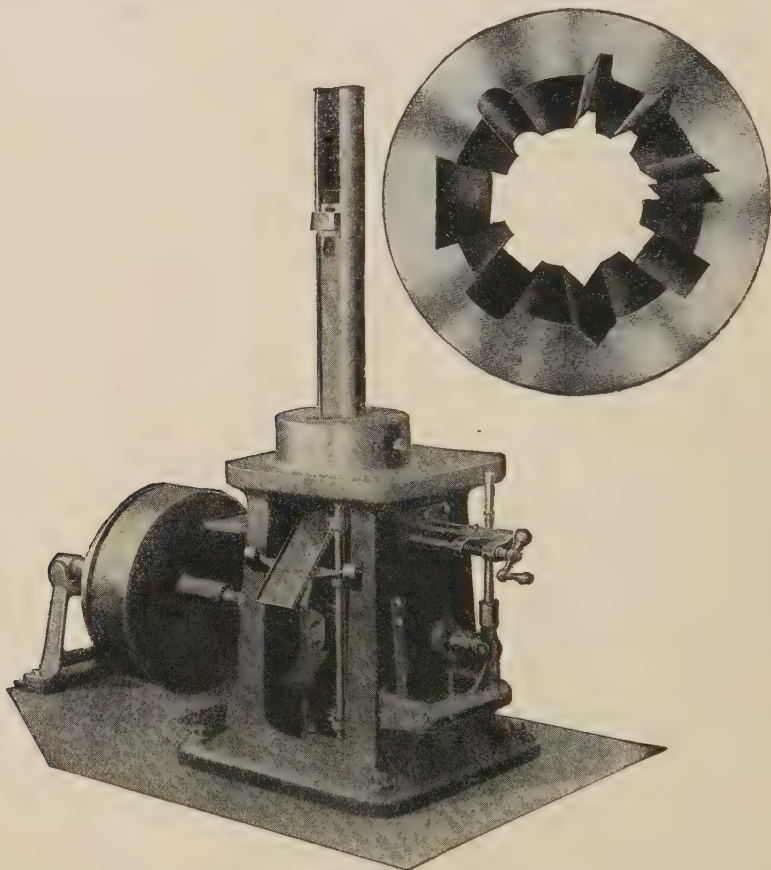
Keyseating Machine and Sample Keyseats in Taper Hole
